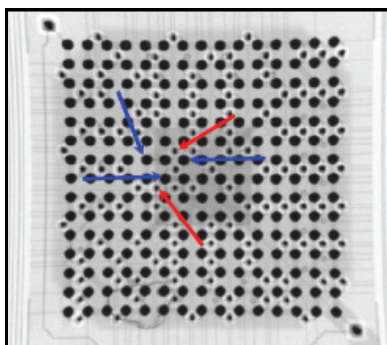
BGA Package with Open Circuit (Red Arrows)
